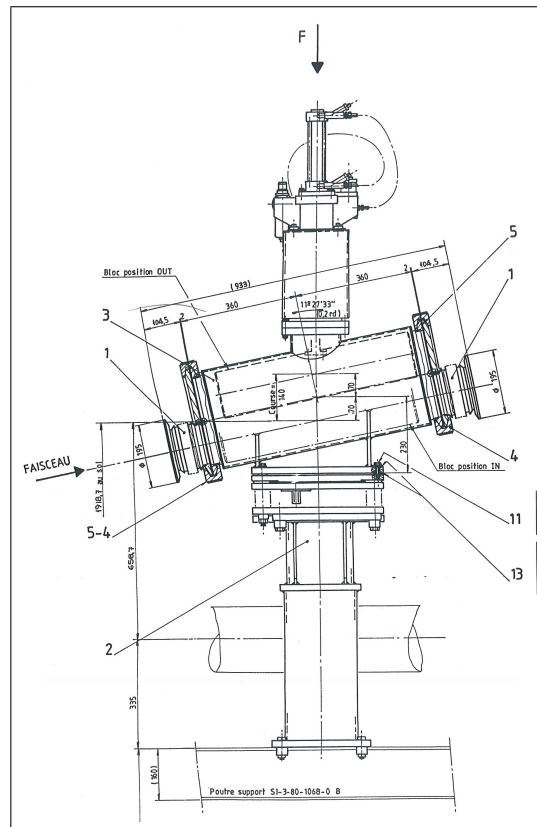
Assembly drawing of the beam stopper BY.STP 103 with its stainless steel core
